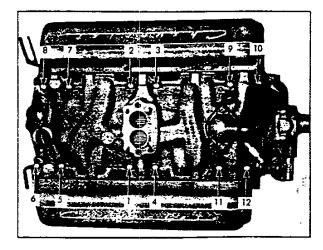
Intake Manifold Bolt Torque Sequence (Typical)
